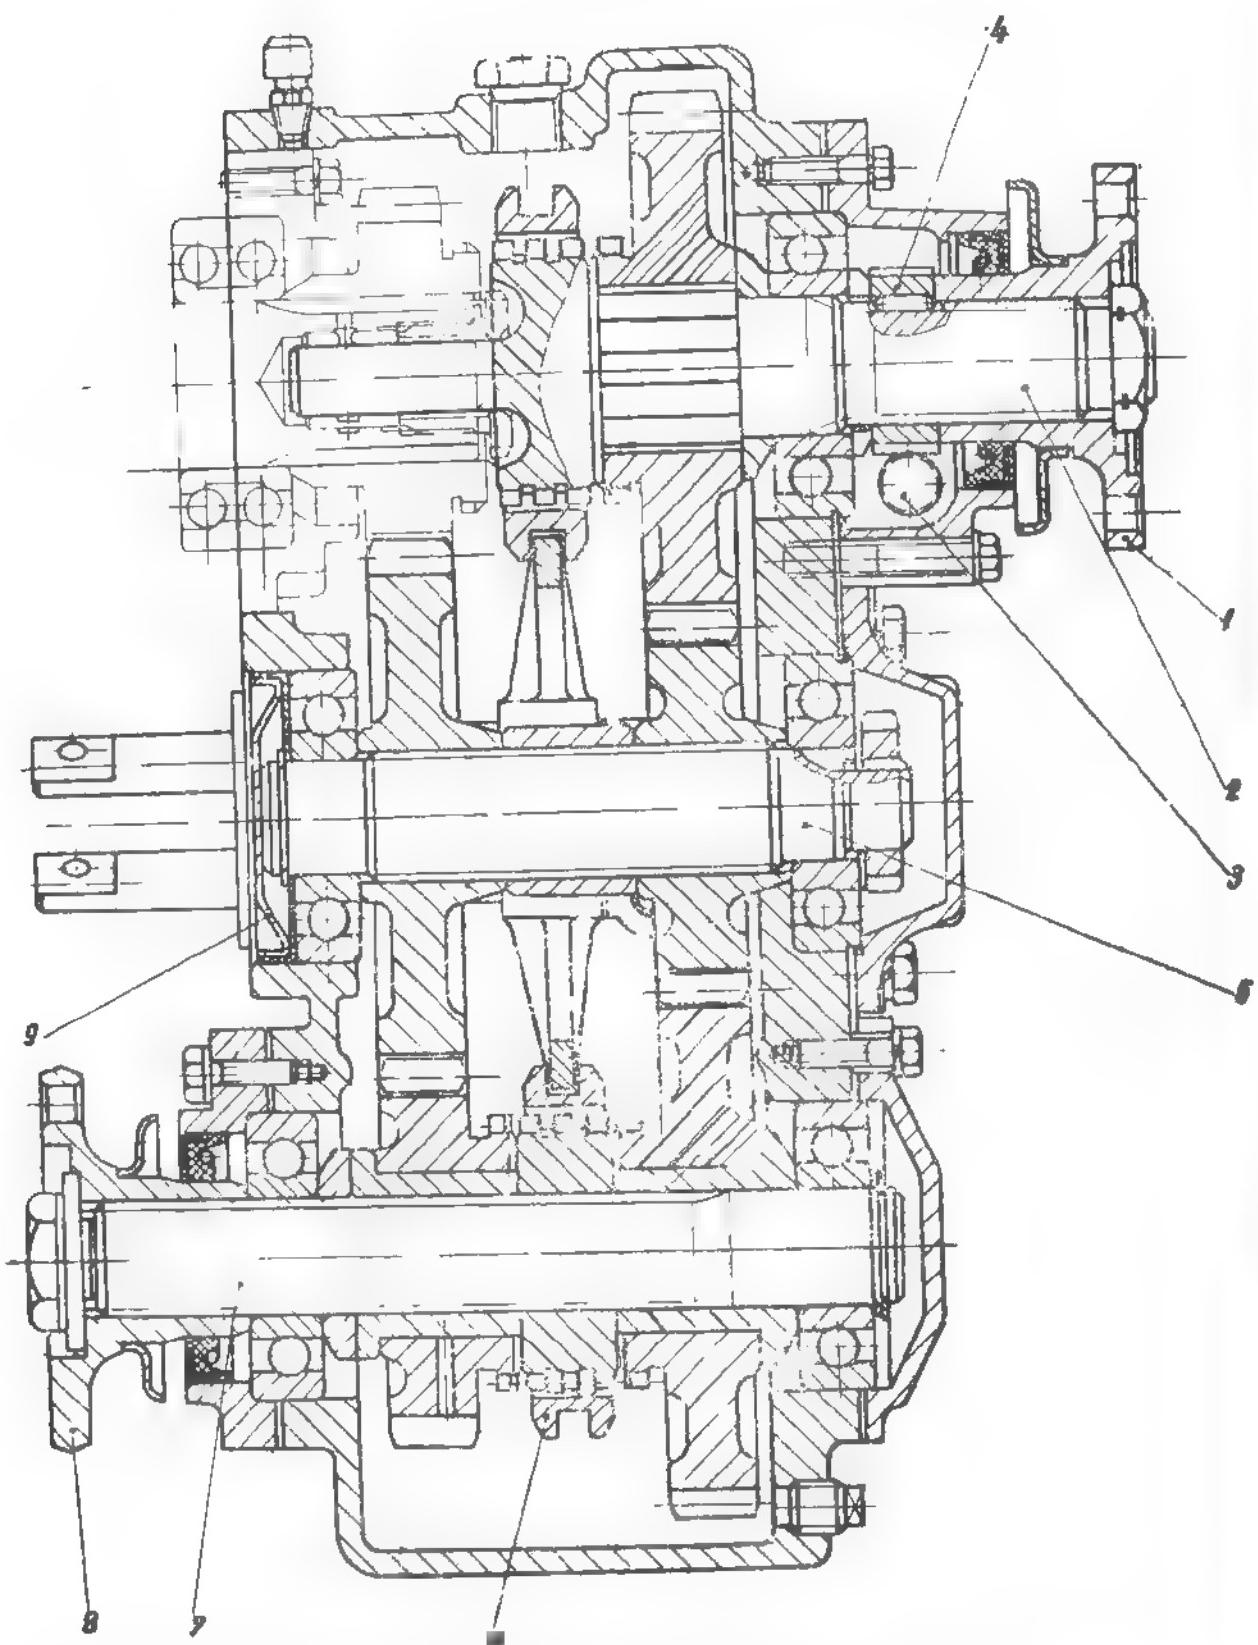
107. TRANSFER BOX GEAR - LONGITUDINAL SECTION
